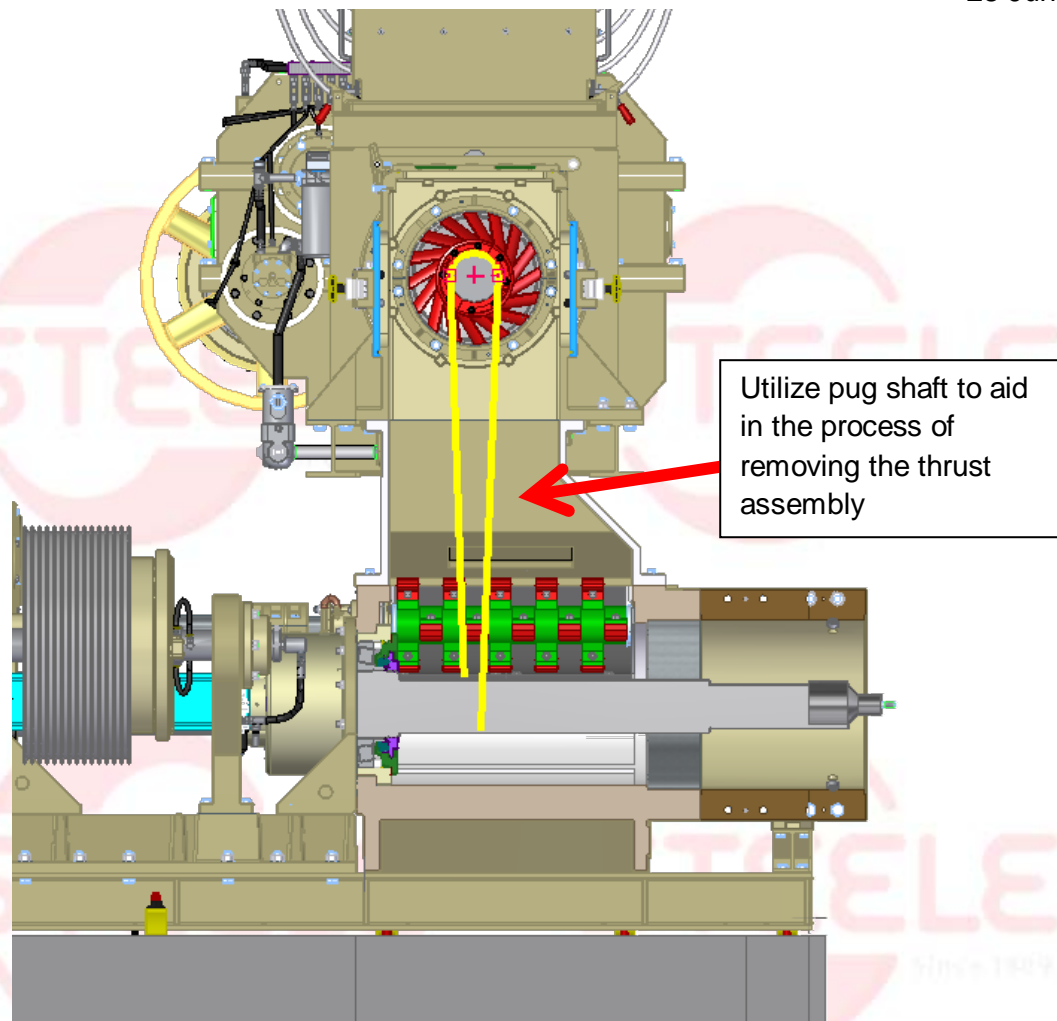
Cross section of pug sealer and extruder, showing how the pug sealer can be used to aid in the process of removing the thrust assembly
